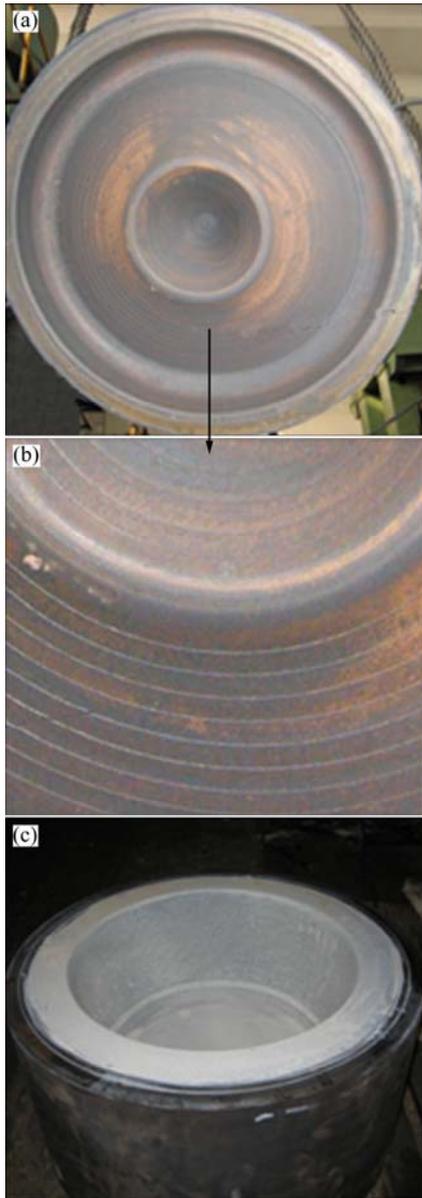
Surface of pre-forming die and forming die: (a), (b) Pre-forming die and grooves on surface; (c) Forming die and BN coating on surface
